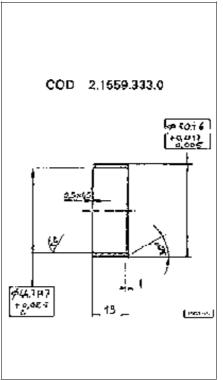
Bushes installed in the gears of the reduction gear unit.
